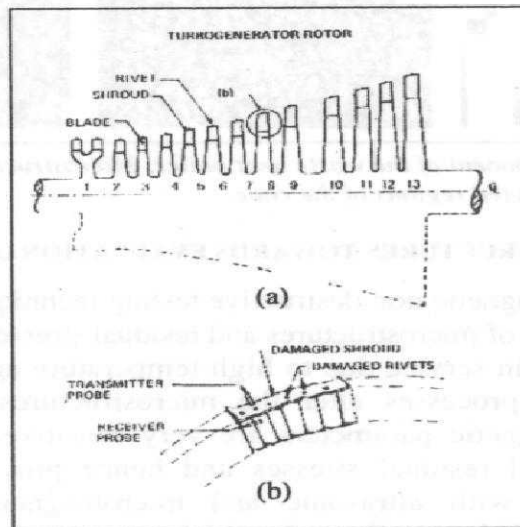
Schematic sketch showing (a) turbogenerator rotor and (b) damaged shroud/ rivets and ultrasonic probe positions
